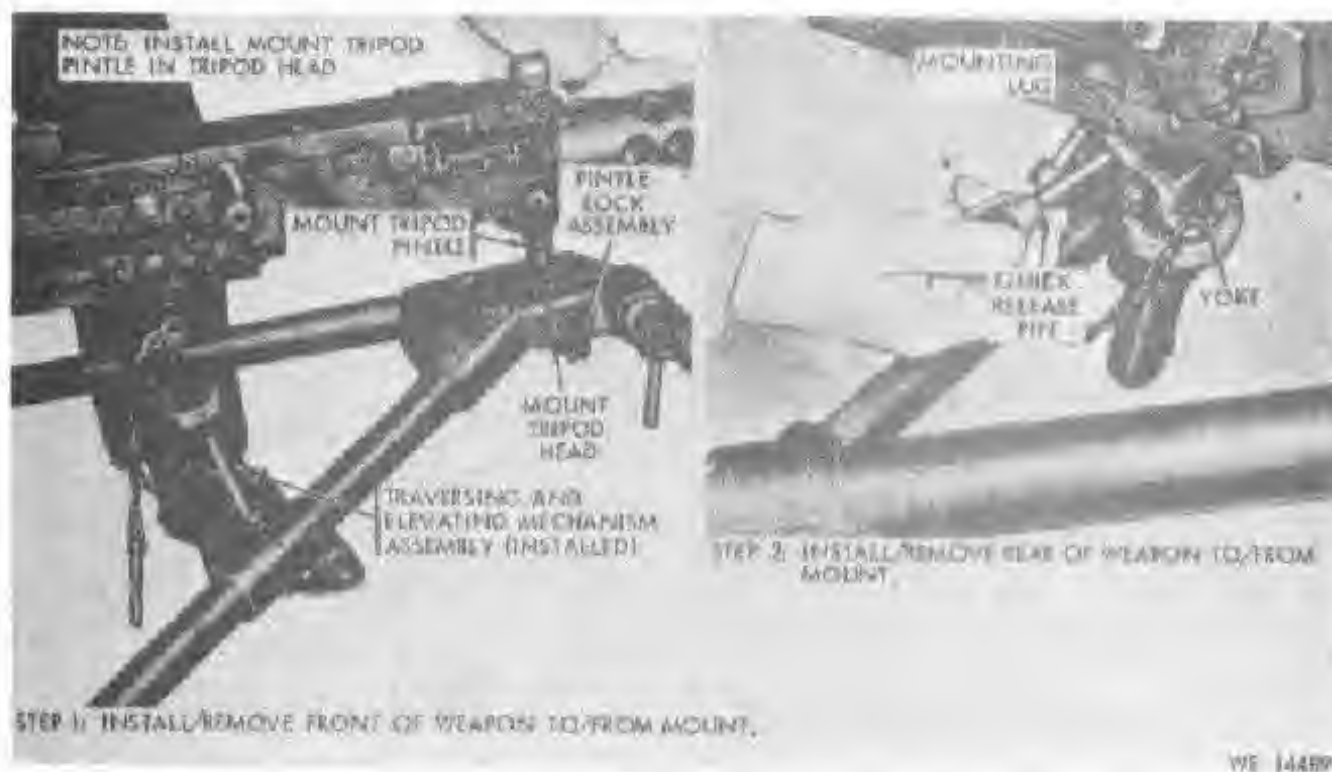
Installation/removal of machine gun on Tripod Mount, M3. (1 of 2)
